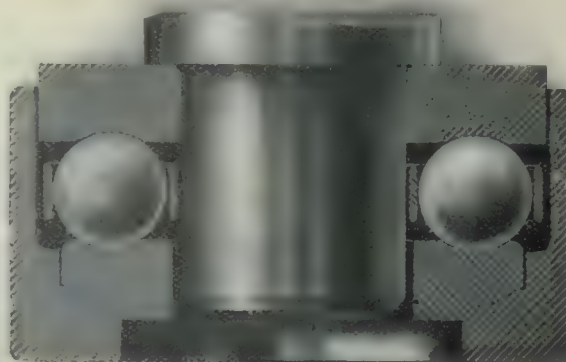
Hoffman Single Ball Thrust Bearing.
